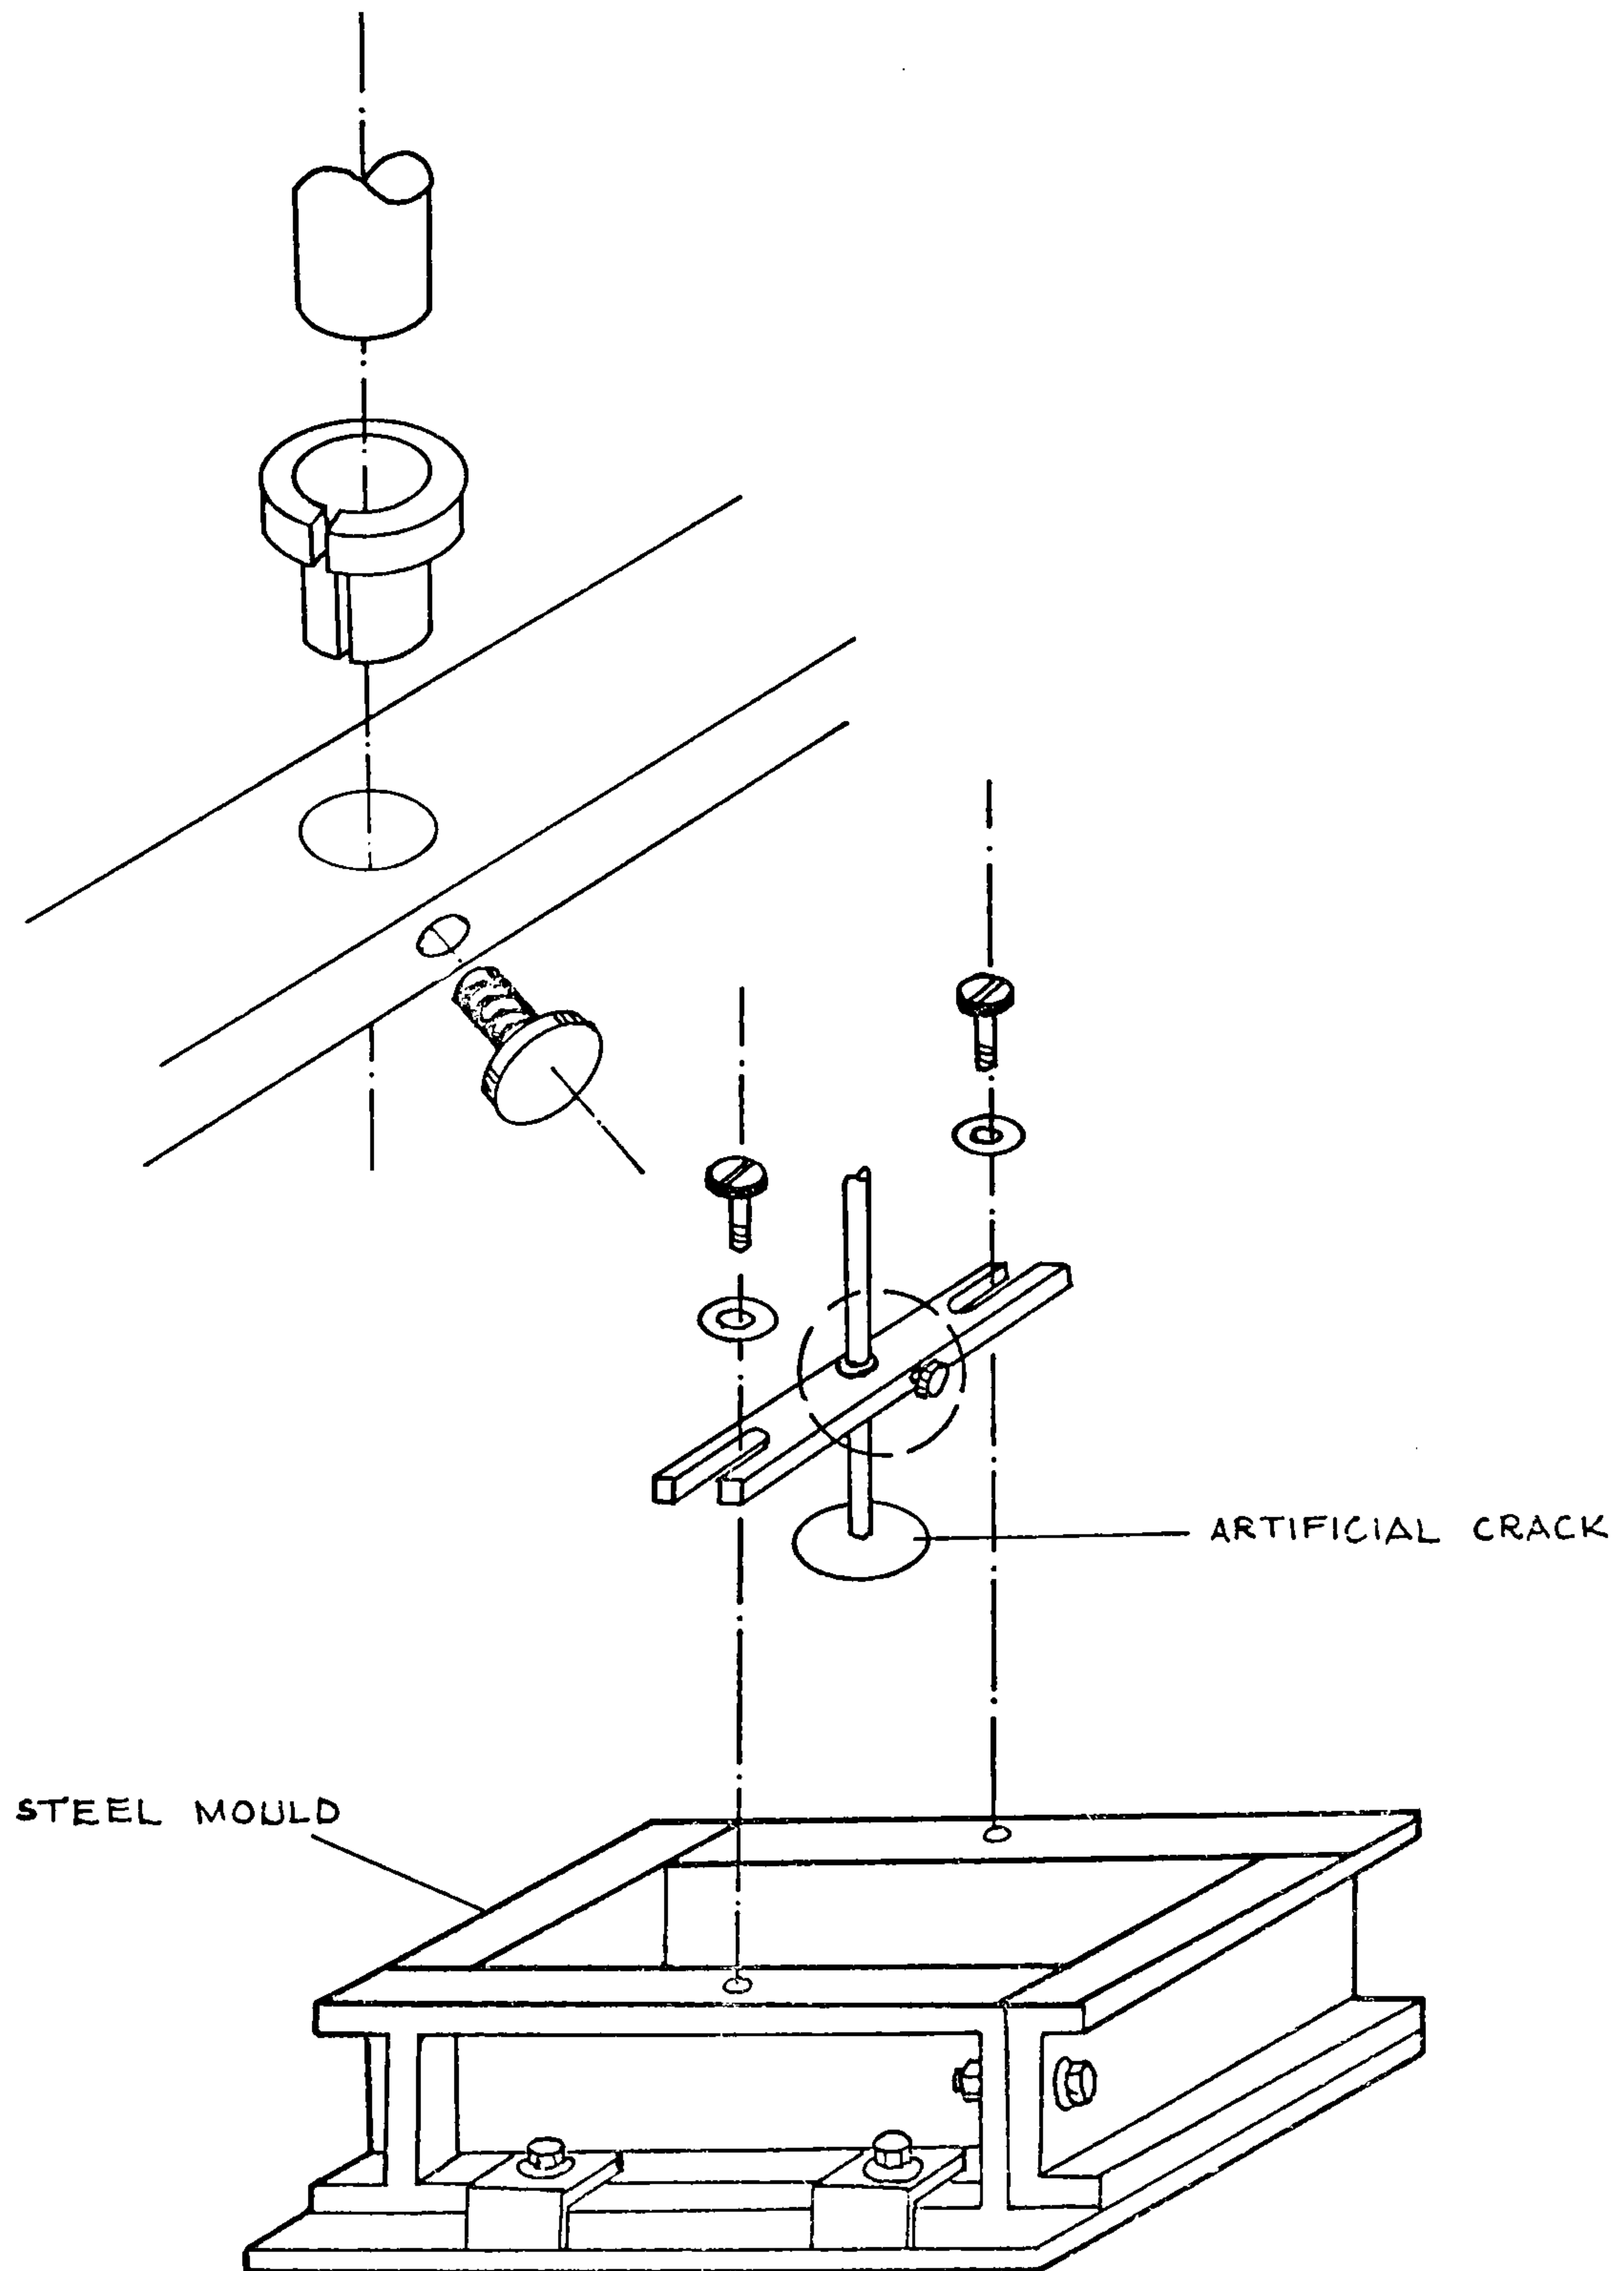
STEEL MOULD AND THE FIXATION OF ARTIFICIAL CRACK
